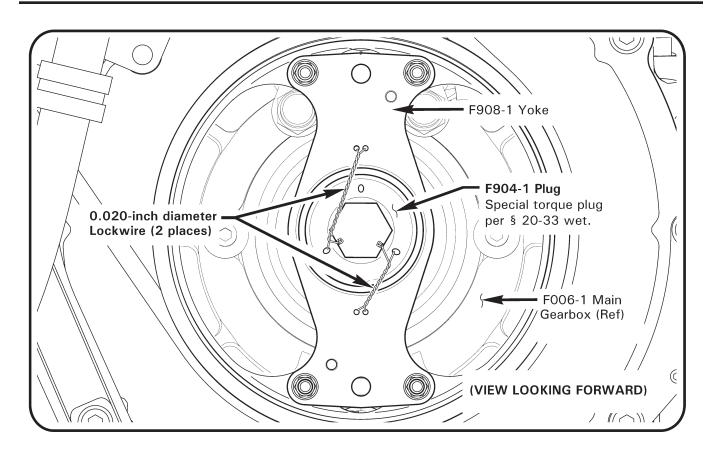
F908-1 YOKE ASSEMBLY INSTALLATION
